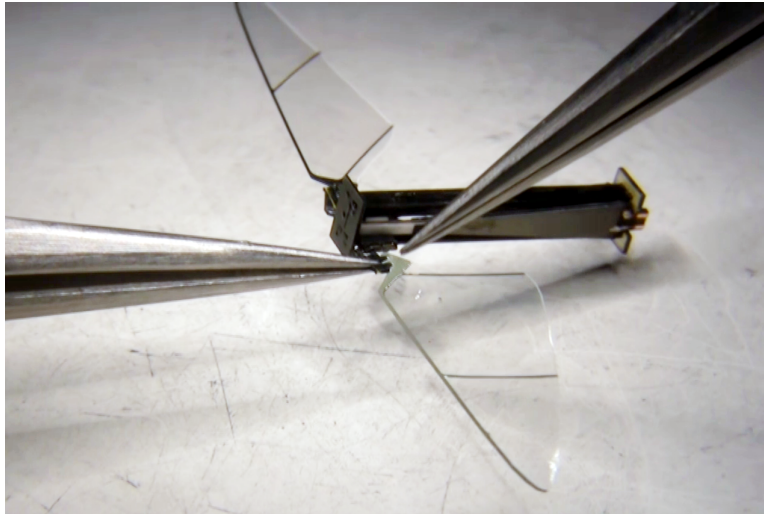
Manual manipulation and assembly of the Robobee using tweezers. Here, a wing is being attached to the body.
